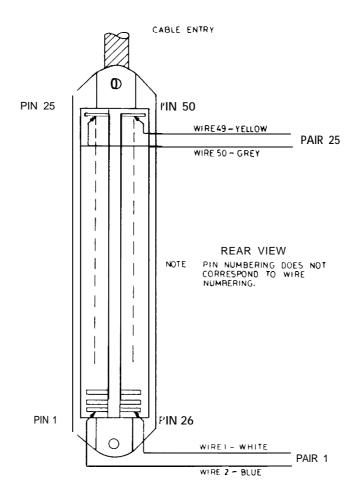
AMP CHAMP CONNECTOR — CABLE TERMINATION
